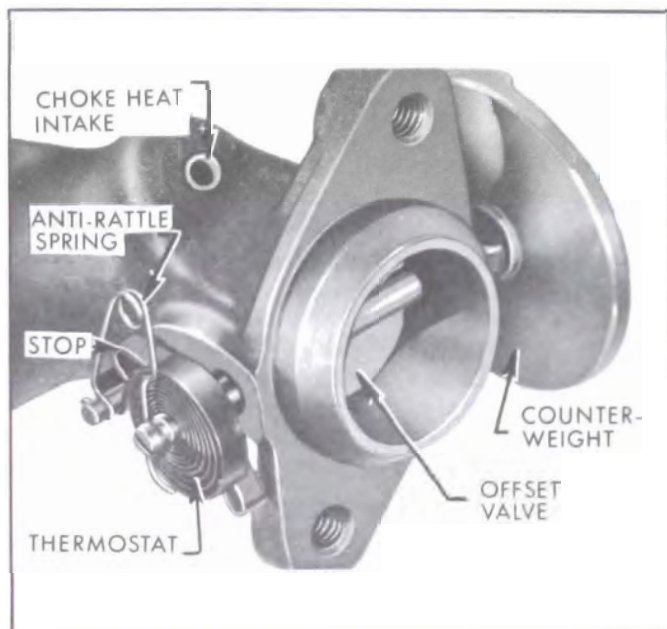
Exhaust Manifold Valve - V-6 Engine
